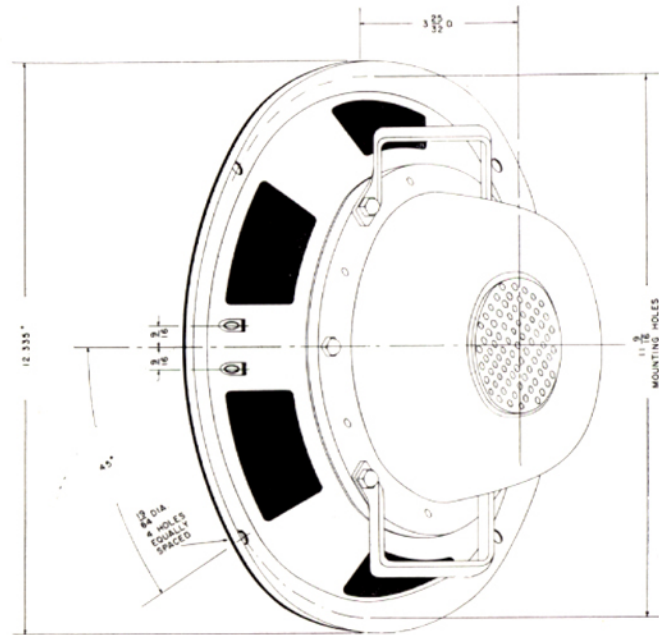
728B Loudspeaker, Dimensional Drawing.
